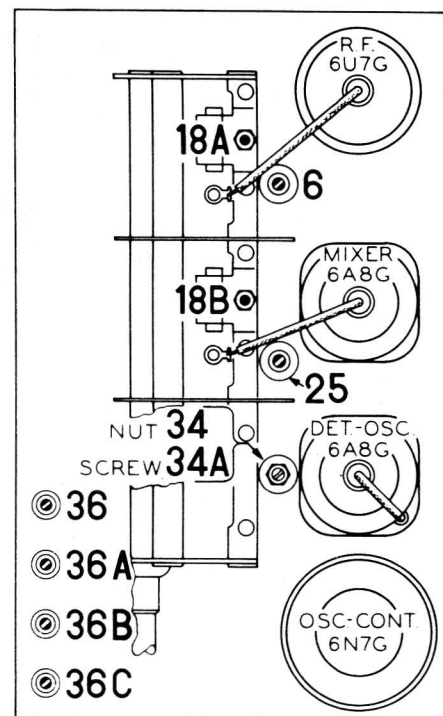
Top View of R. F. Unit Showing Compensator Locations
